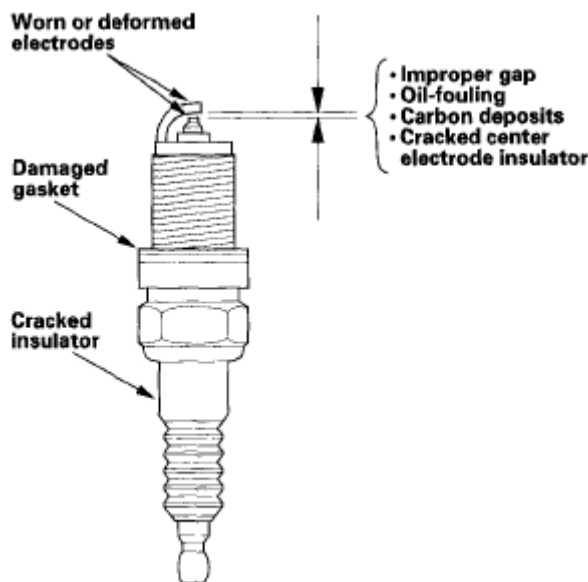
Identifying Worn Or Deformed Electrodes, Damaged Gasket, Cracked Insulator And Improper Gap
